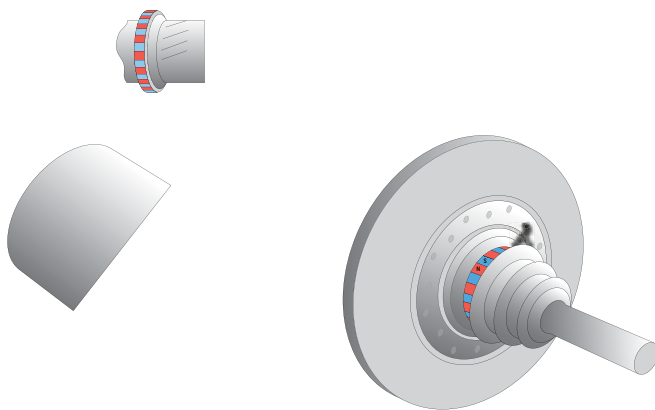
AMR Sensor IC (shown in probe style housing) Mounting Orientation
